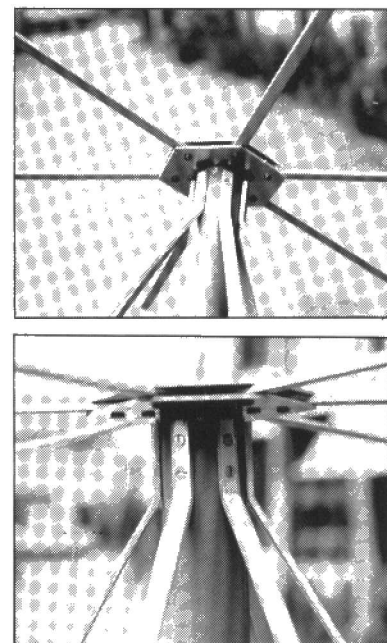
All holes in the top plate (left) must be drilled to receive screws with countersunk heads. The construction of the lower plate is shown in the right-hand drawing. If threaded bushes are not available, drill 3 mm holes instead to fit M3 bolts and nuts.
